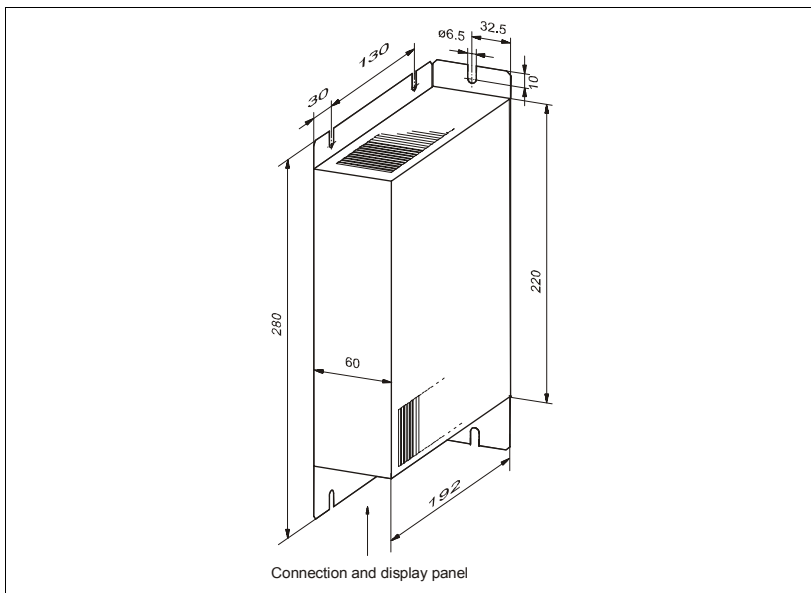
Dimensions and preferred mounting position of the GSP VARIO (mm)
